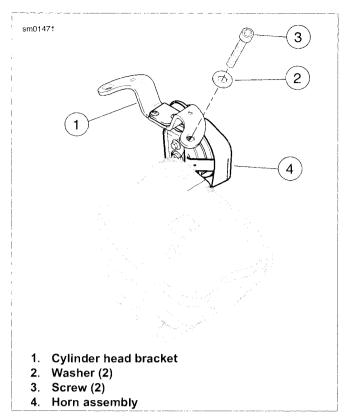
Horn and Cylinder Head Bracket (side mounted horn)
